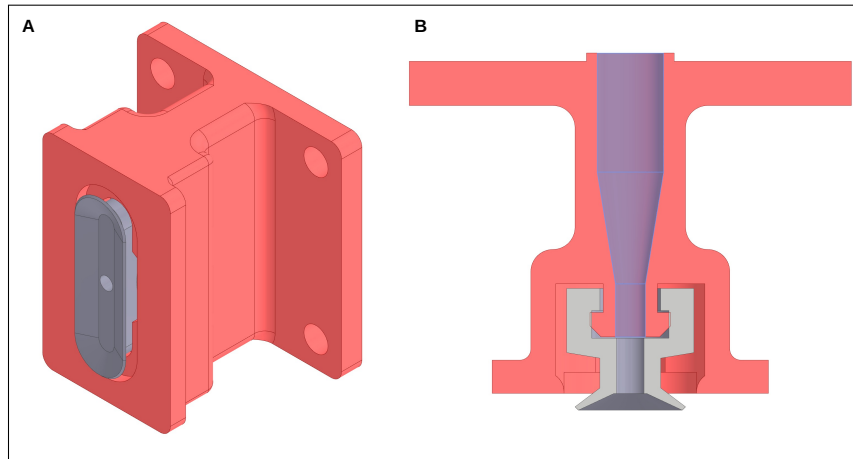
A) Vacuum cup trial prototype - B) Cross-section view of the vacuum cup trial, where the vacuum cavity is highlighted in blue
